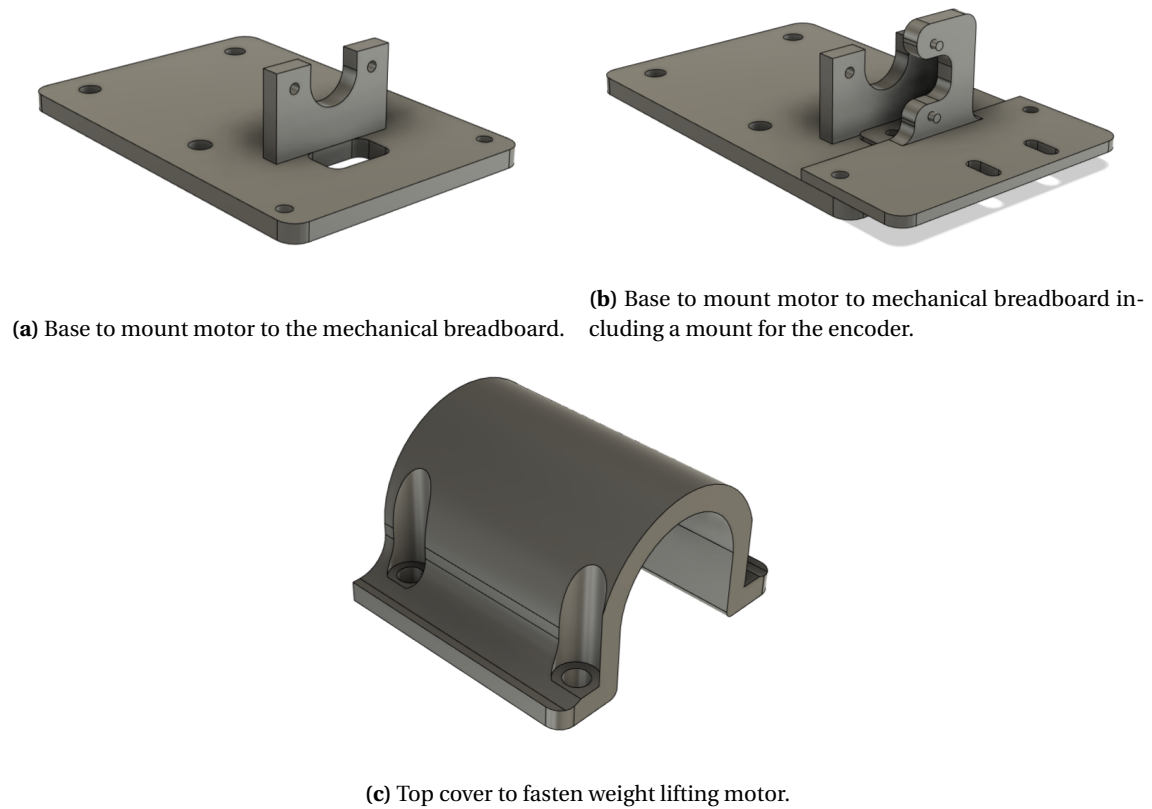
3D-printed parts to mount weight lifting motor and encoder.
